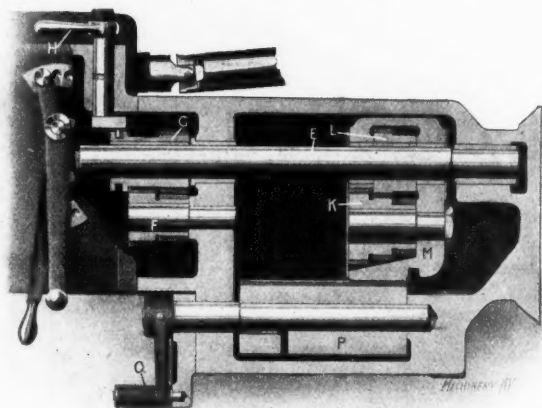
Design of Tumbler Gearing for Spindle Drive
